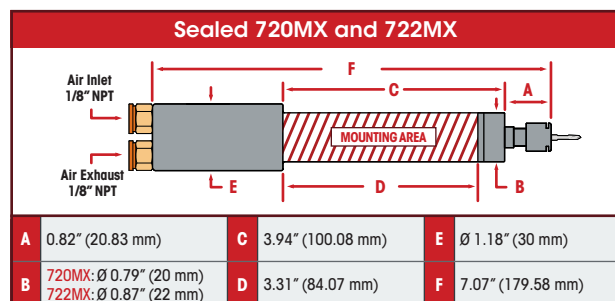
Tables that show the proper mounting area and dimensions for mounting Air Turbine Motors®.
